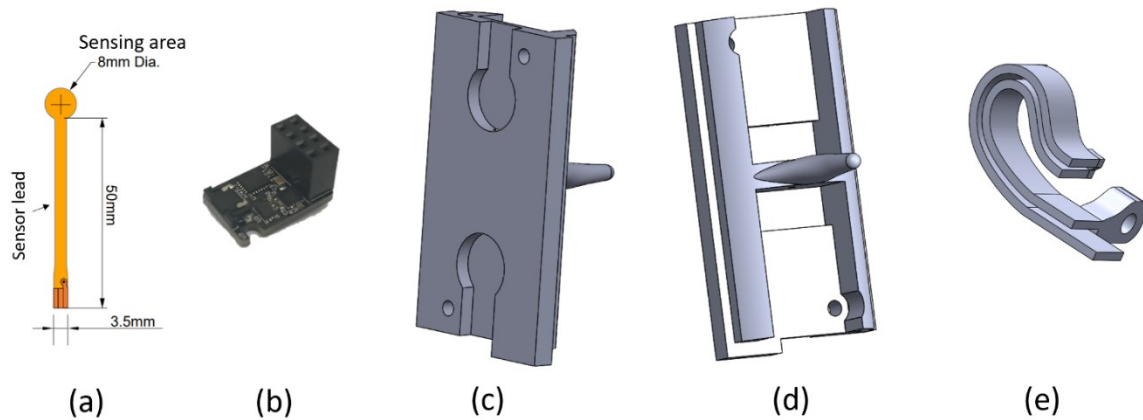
The electrode array holder components. (a) SingleTact pressure sensor. (b) Pressure sensor interface board. (c) View of EAH showing cut outs for pressure sensors. (d) View of EAH showing where the interface board sits and the post. (e) Housing for the pressure sensor leads.
